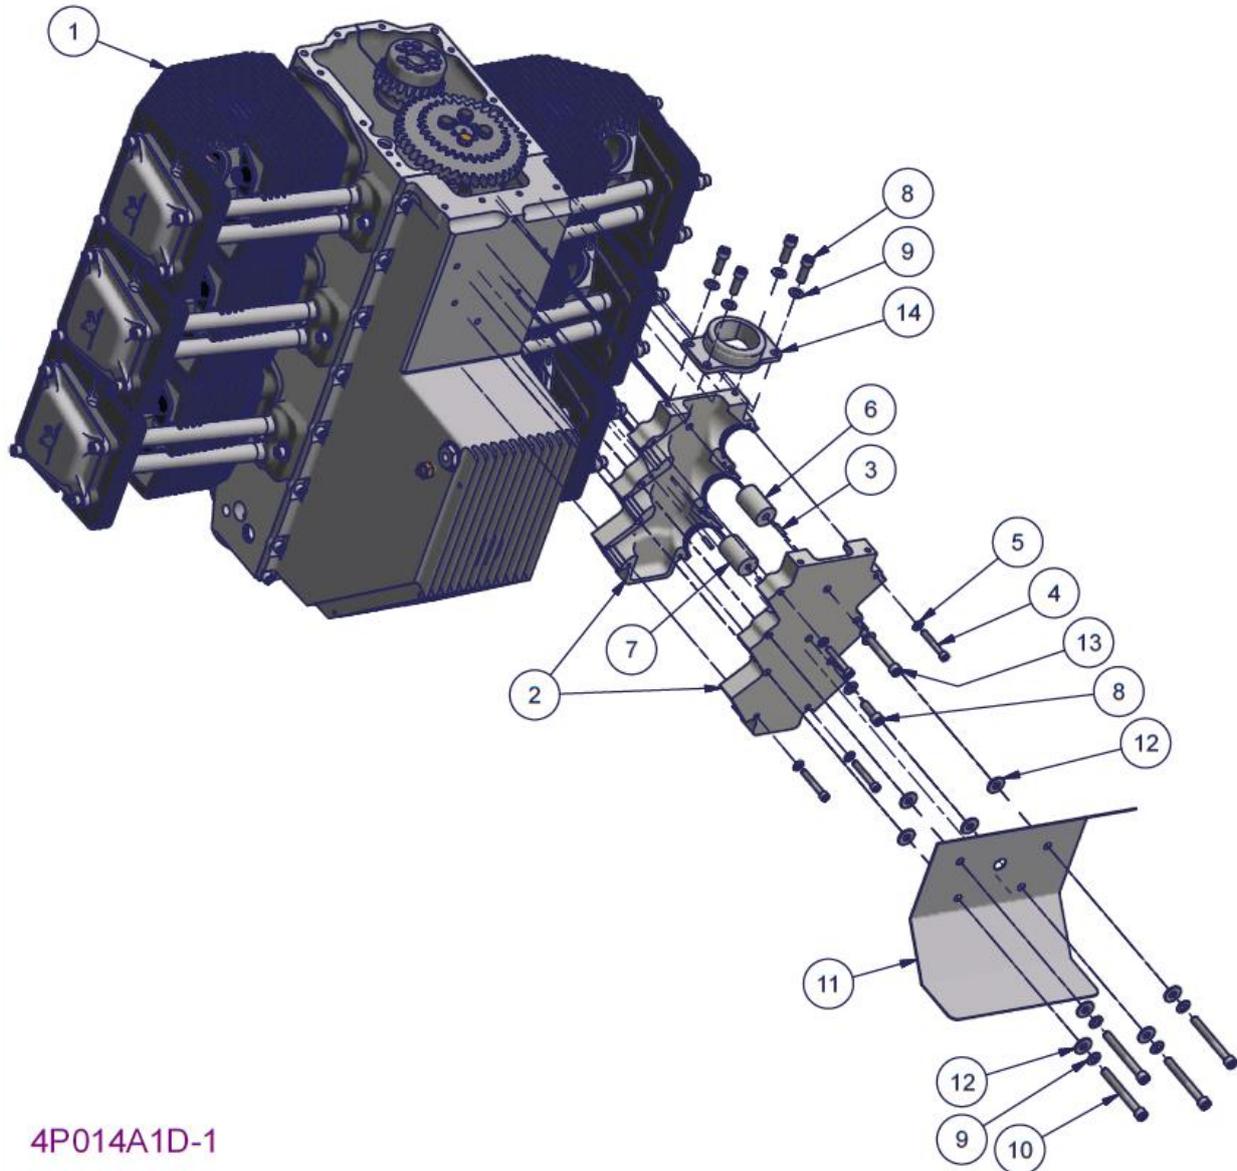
3300 Plenum and heat shield installation – Parts List
